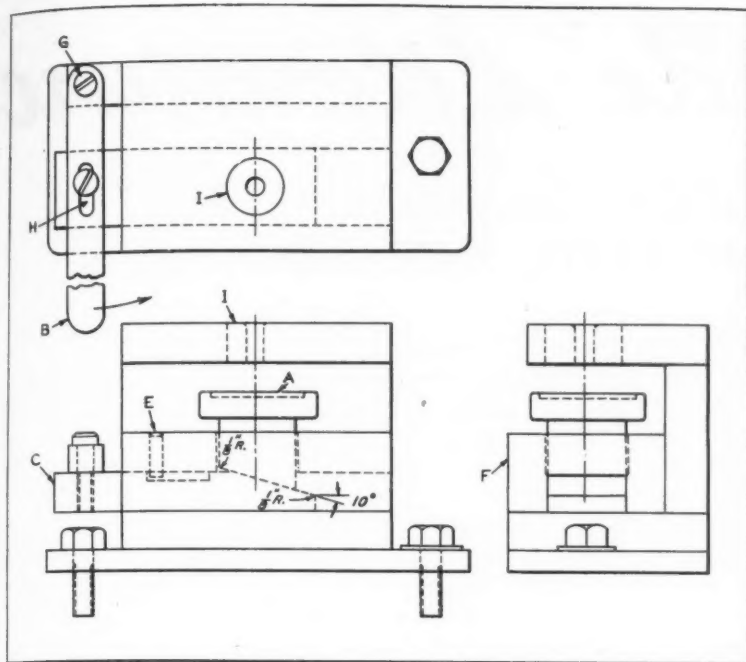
Die Employed for Final Forming Operation on Gripper Pad
